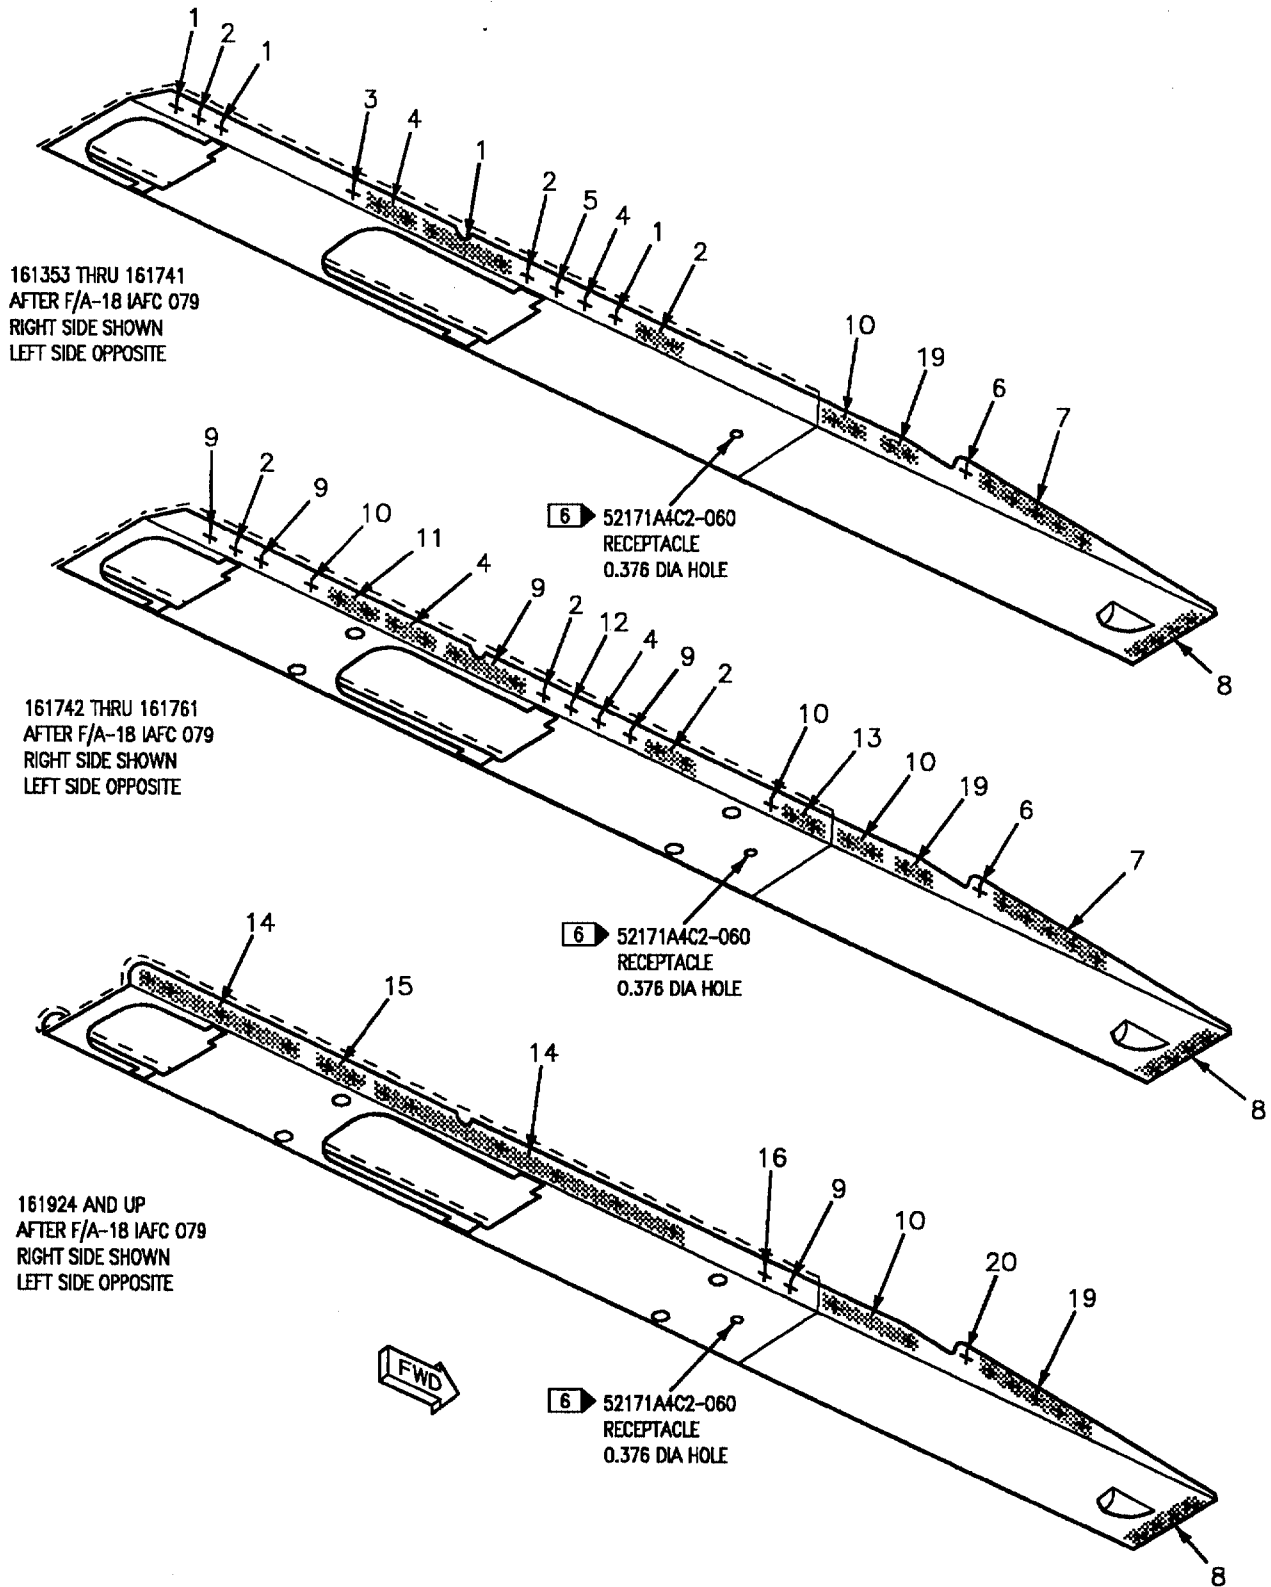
Fairing 74A332518 Replacement (Sheet 2)
